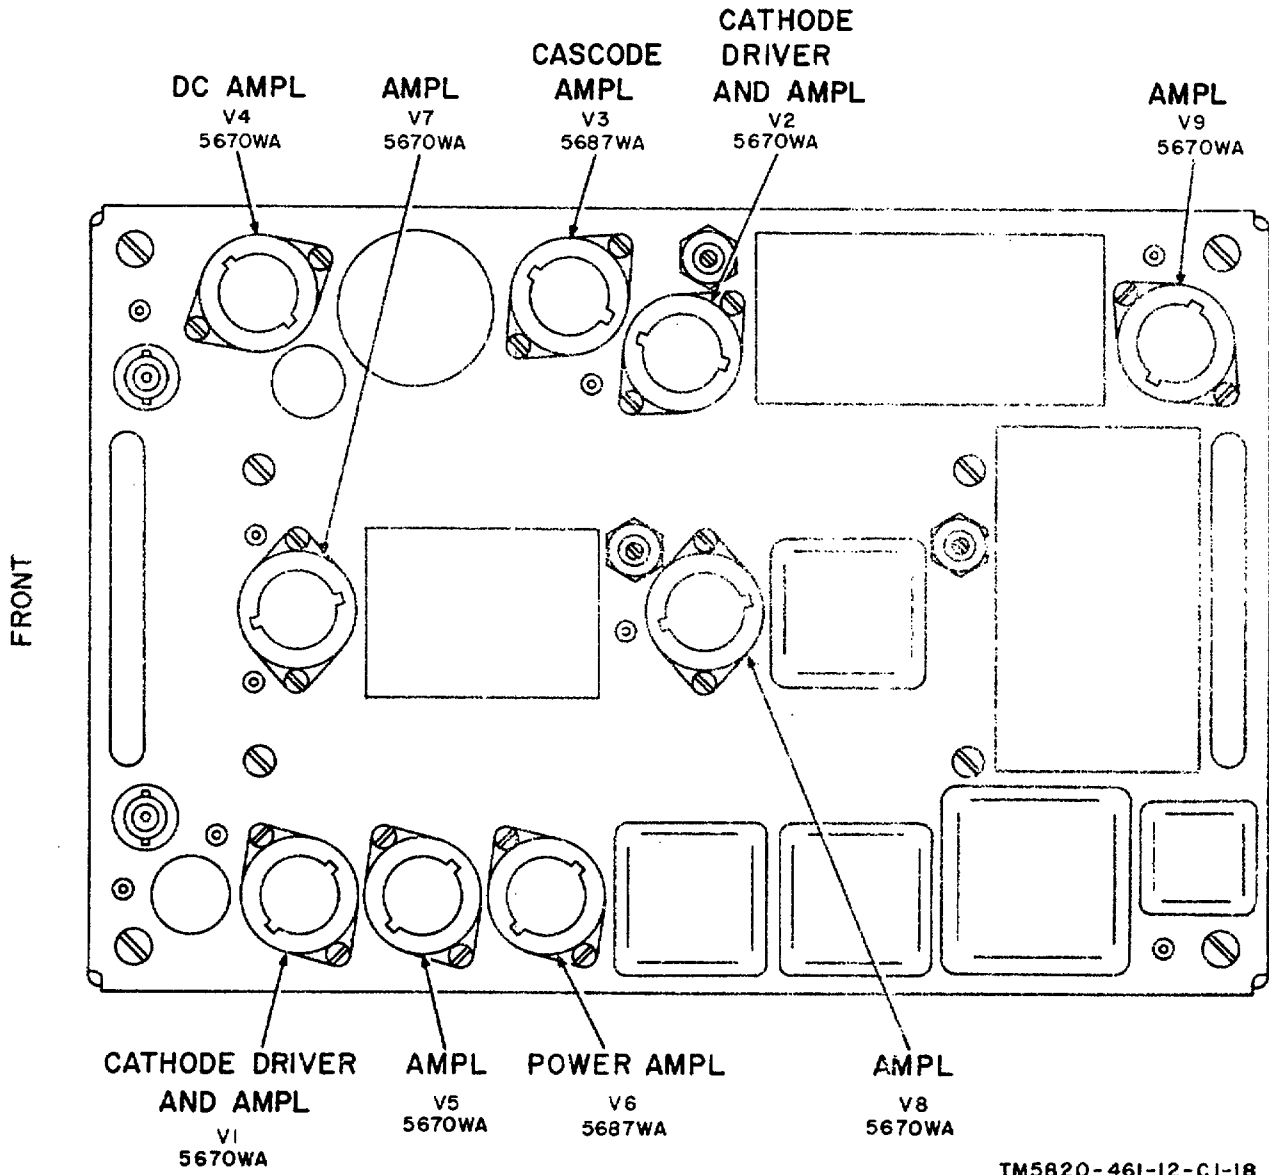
Baseband assembly 3A3 (part of R-1331(*) (P)/GRC or R-1148(P)/GRC), tube locations.
